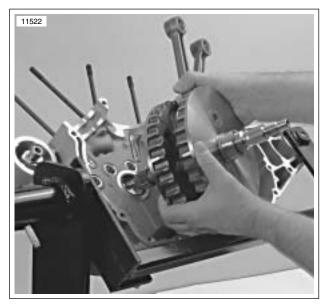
Installing Flywheel Assembly In Right Crankcase
